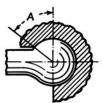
Toggle or pawl joint. Angle A should be 30 to 45 deg. to retain the member.
